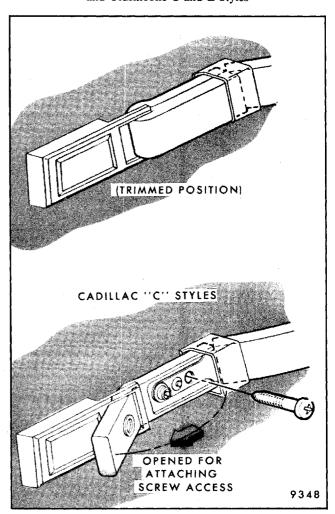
Typical Door Pull Handle Attachment - Cadillac C Styles
